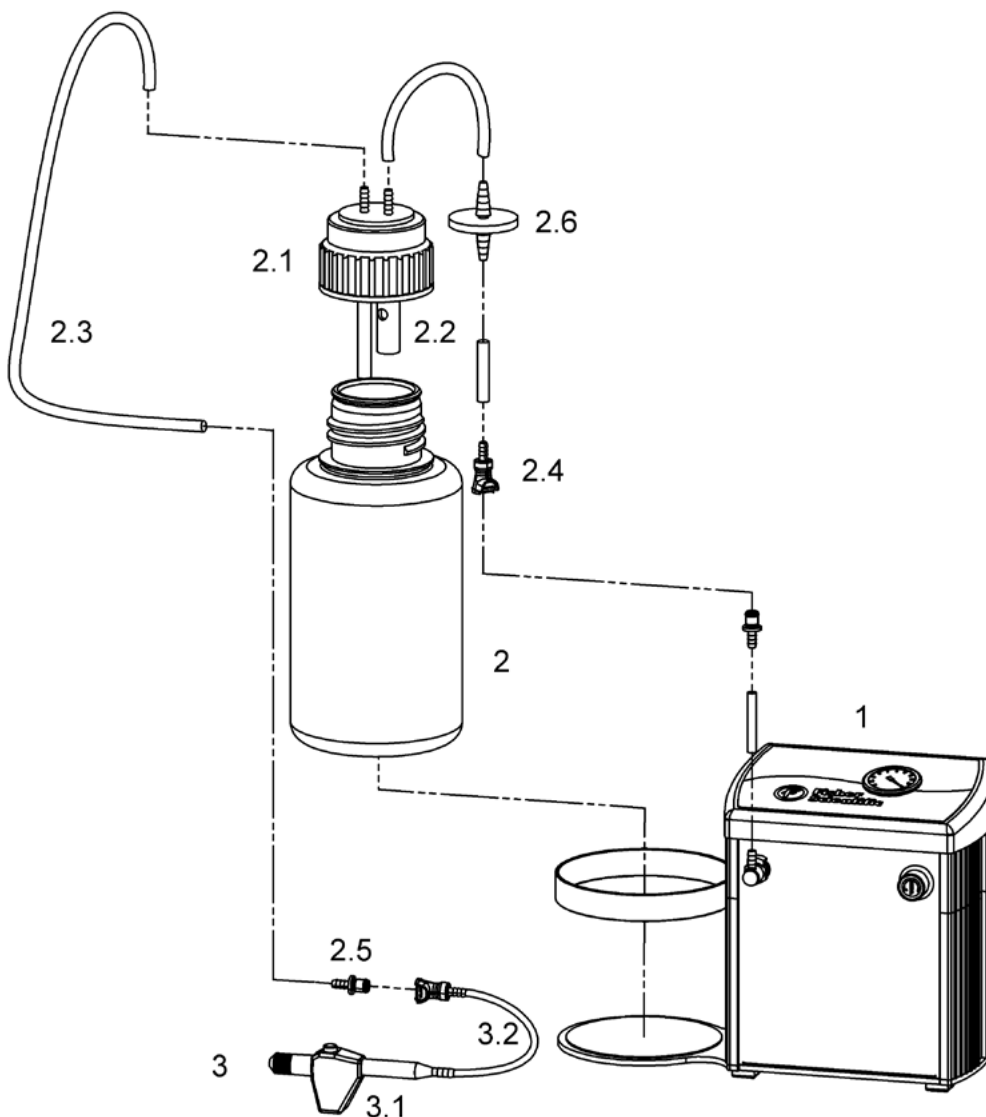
Explosion view (Aspiration Advantage System) Complete unit)
